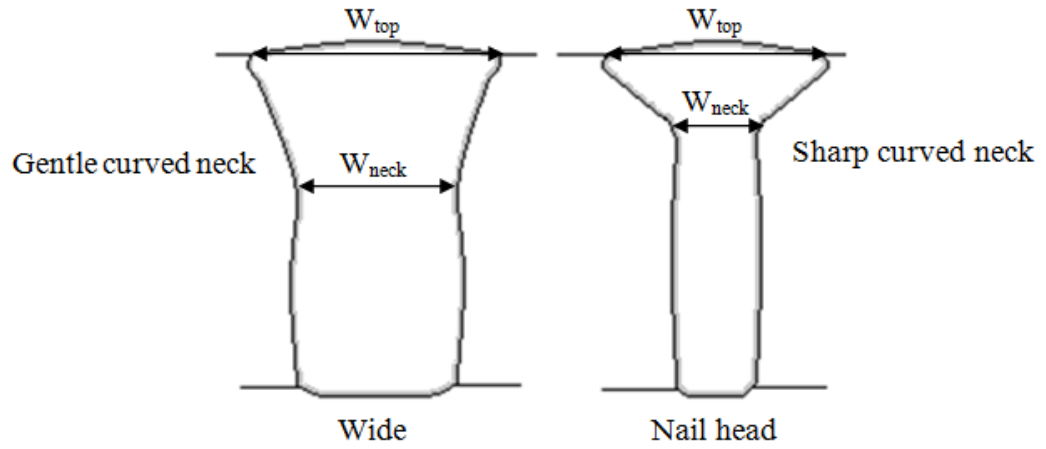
Schematic drawing of weld cross-sections showing W_{top} and W_{neck}
